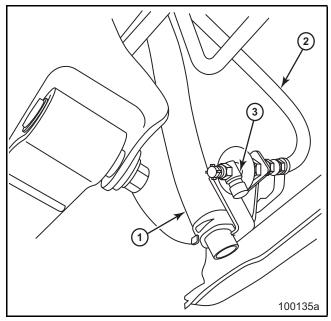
Remote Bleeder Valve and Bracket Assembly (E-150/250/350 Van/Wagon Shown)
